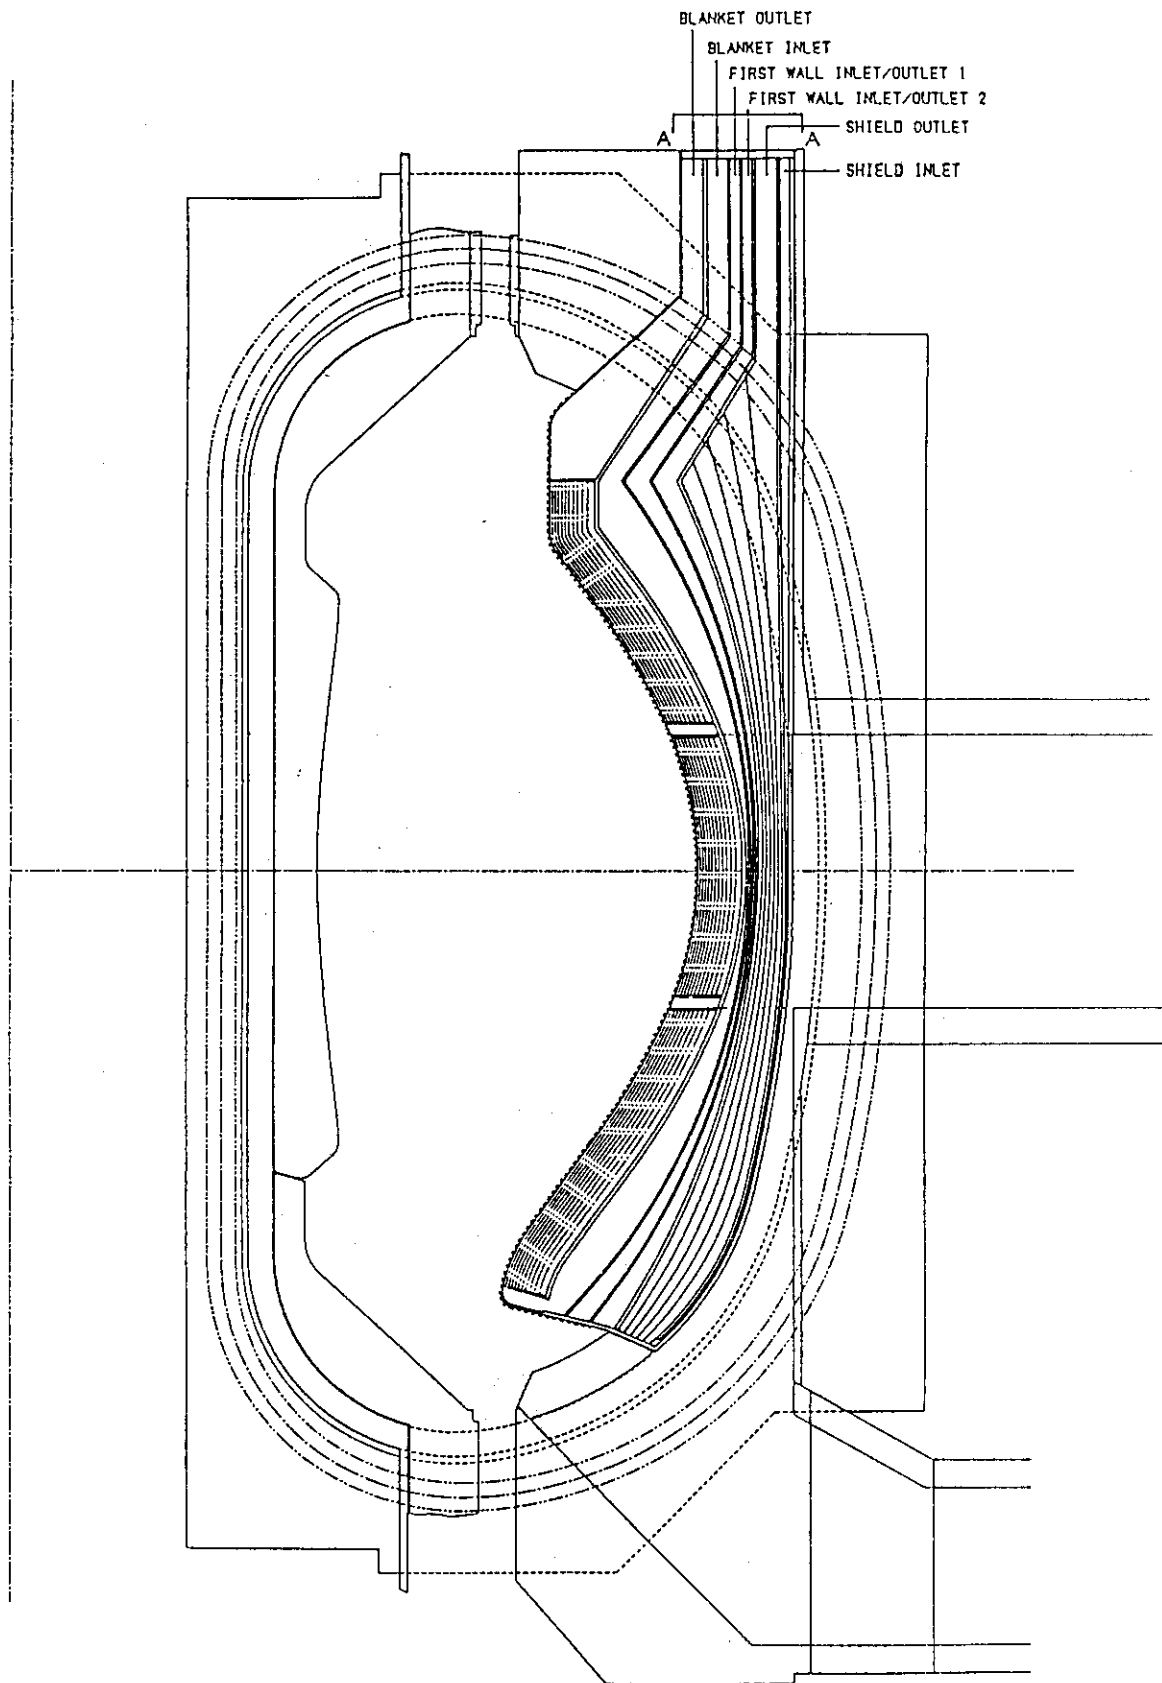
Elevation view of outboard side module (mixed pebble bed blanket)
